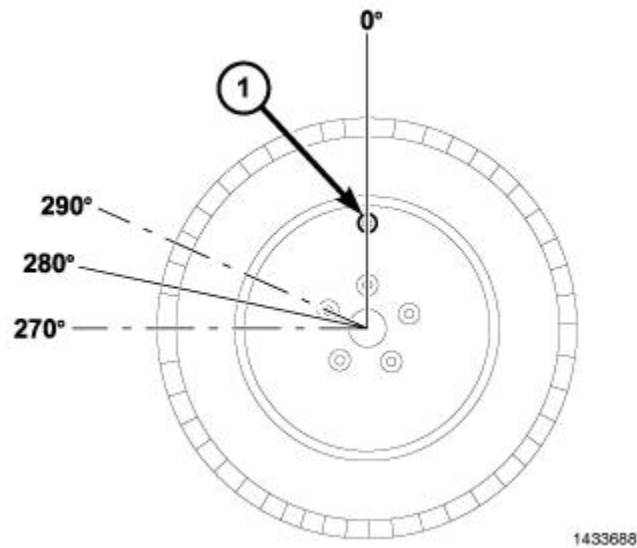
Start Mount/Dismount Tool Within 10 Degrees Of Valve Stem
